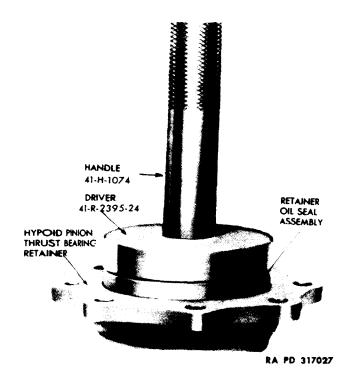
Installing Hypoid Pinion Thrust Bearing Retainer Oil Seal
